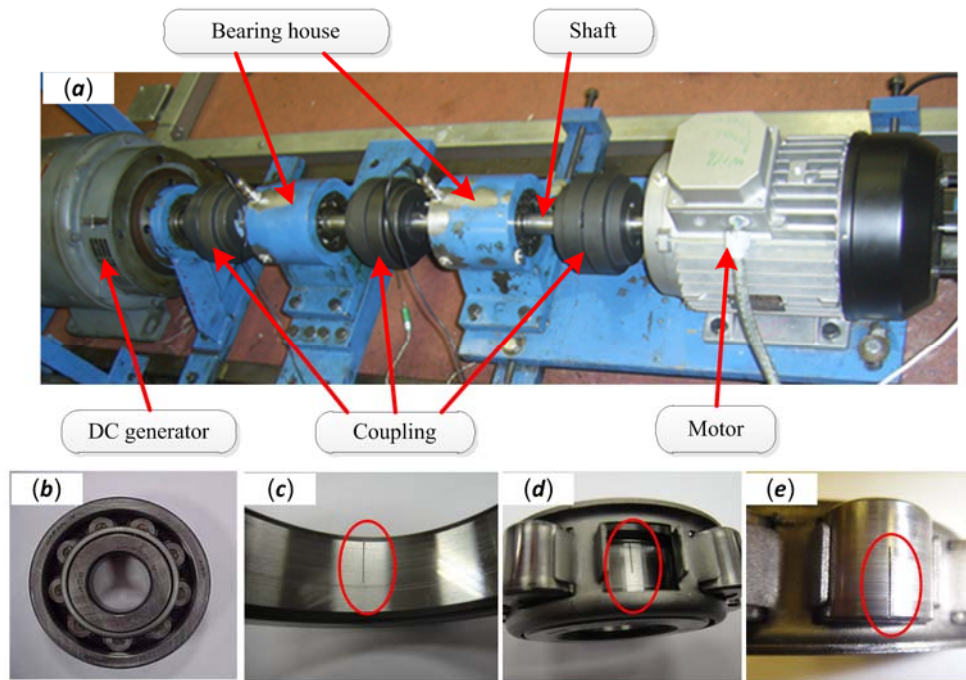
Bearing test rig and bearings for experiments: (a) bearing test rig, (b) healthy bearing, (c) bearing with outer race defect, (d) bearing with inner race defect and (e) bearing with roller defect
